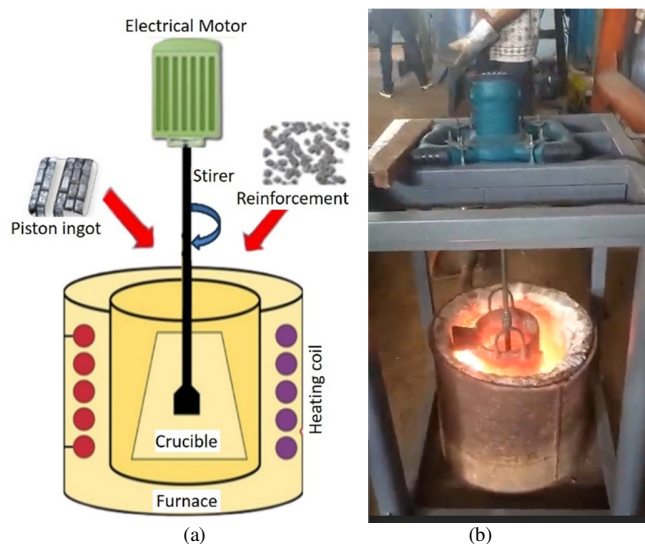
Stir casting process: (a) schematic and (b) actual process.
